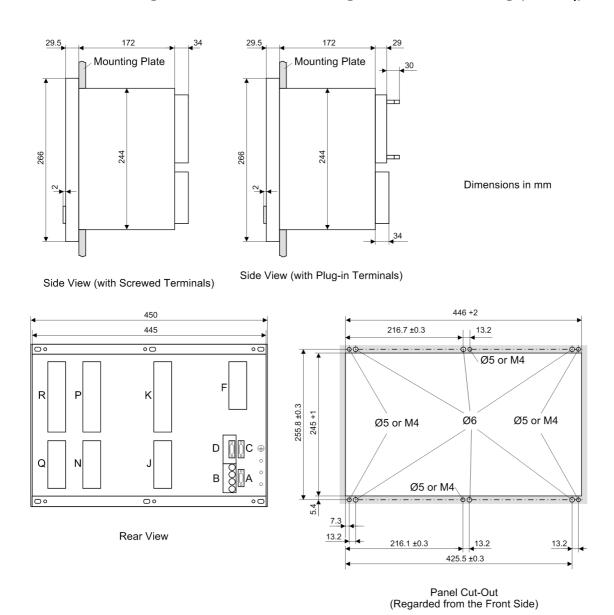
Dimensions of a 7UM622 for Panel Flush Mounting or Cubicle Installation (size 1/1)
